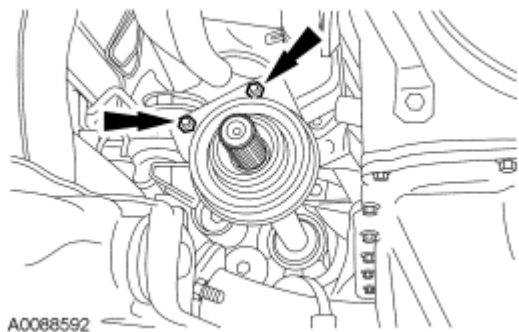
Locating Intermediate Shaft Retaining Nuts
